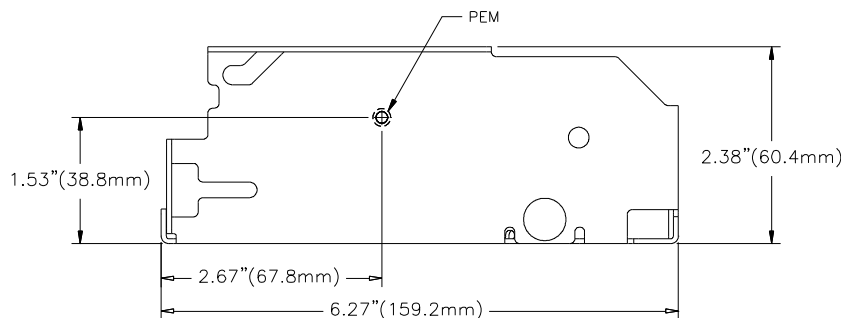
Main Chassis Mounting: Side of “Core” Printer
